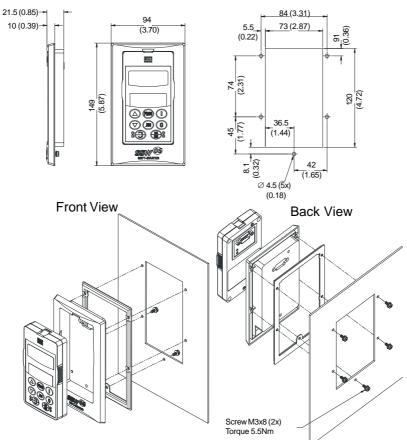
Dimensions in mm (in) and how to install the Keypad in the panel and frame
